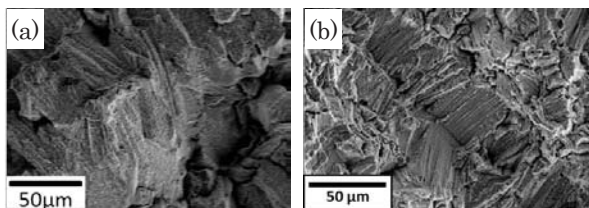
Fracture surfaces of SLM (a) as-built and (b) STA specimens.
